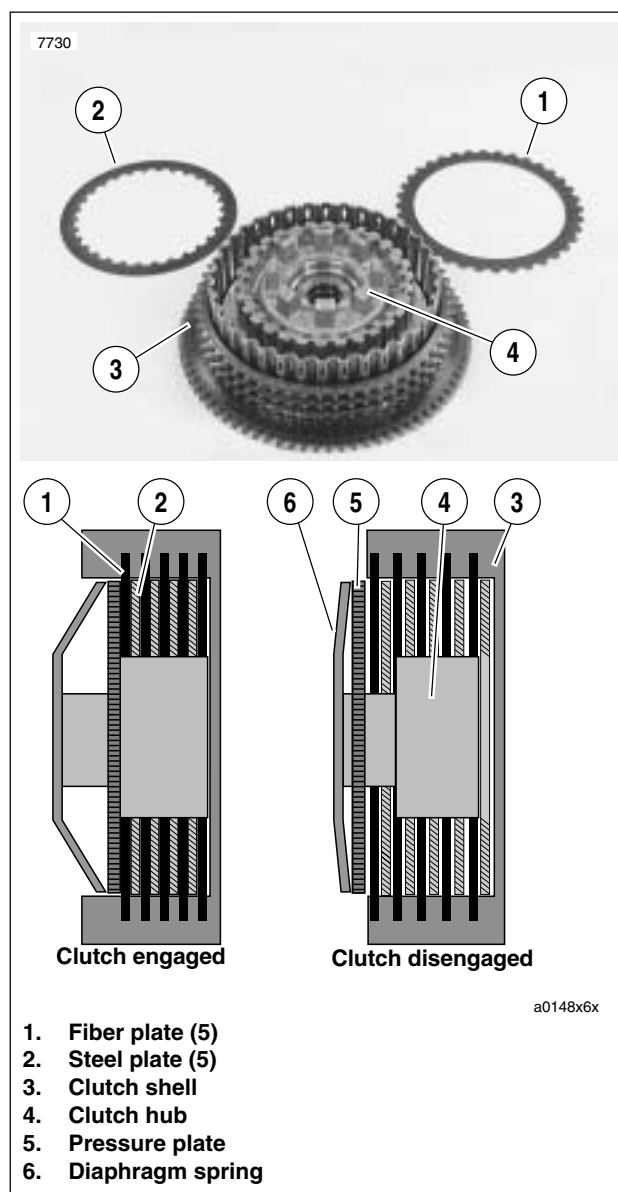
Clutch Plates and Hub/Shell Assembly
